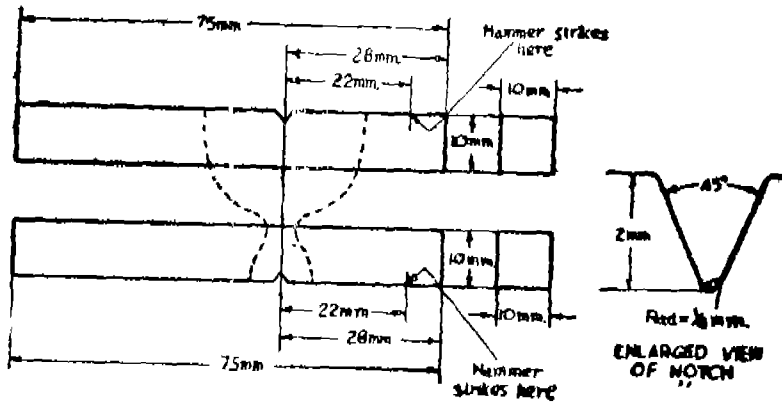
Specimens 4a and 4b Izod impact test pieces.
